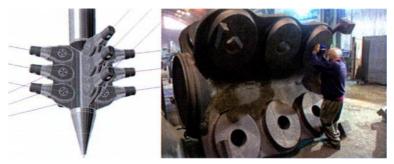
Cast steel footing - the heaviest connector of the cable system - weight 18 t
